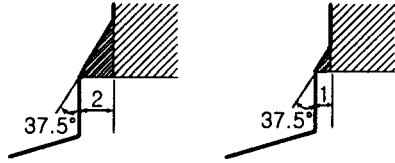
Schematic Illustration of Drilling Process when drill exits with step drill.
